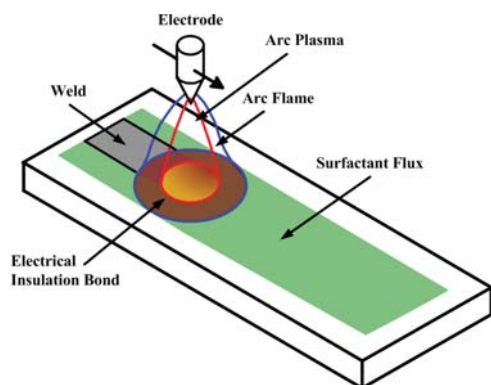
Schematic diagram of EIB during TIG-SF welding.
